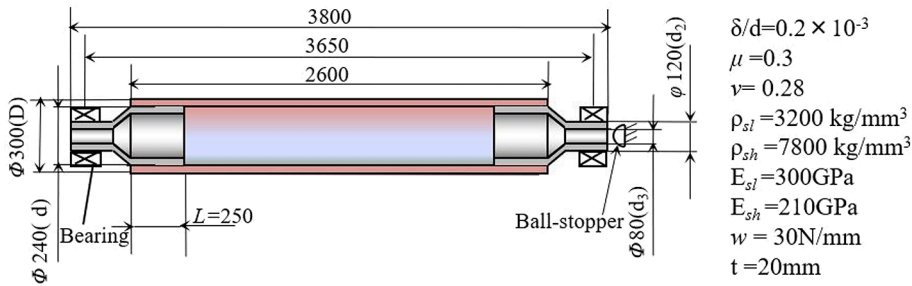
Three dimensional model with standard dimensions considered in this paper (mm).
